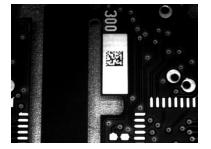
Dot Matrix Code Directly Marked on PCB Copper Pad by Using Ink-Jet Technology
